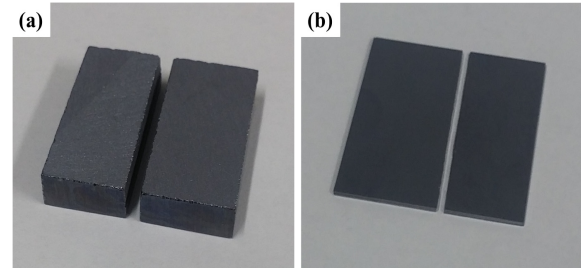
Photo images of typical workpieces sliced by WEDM process.
